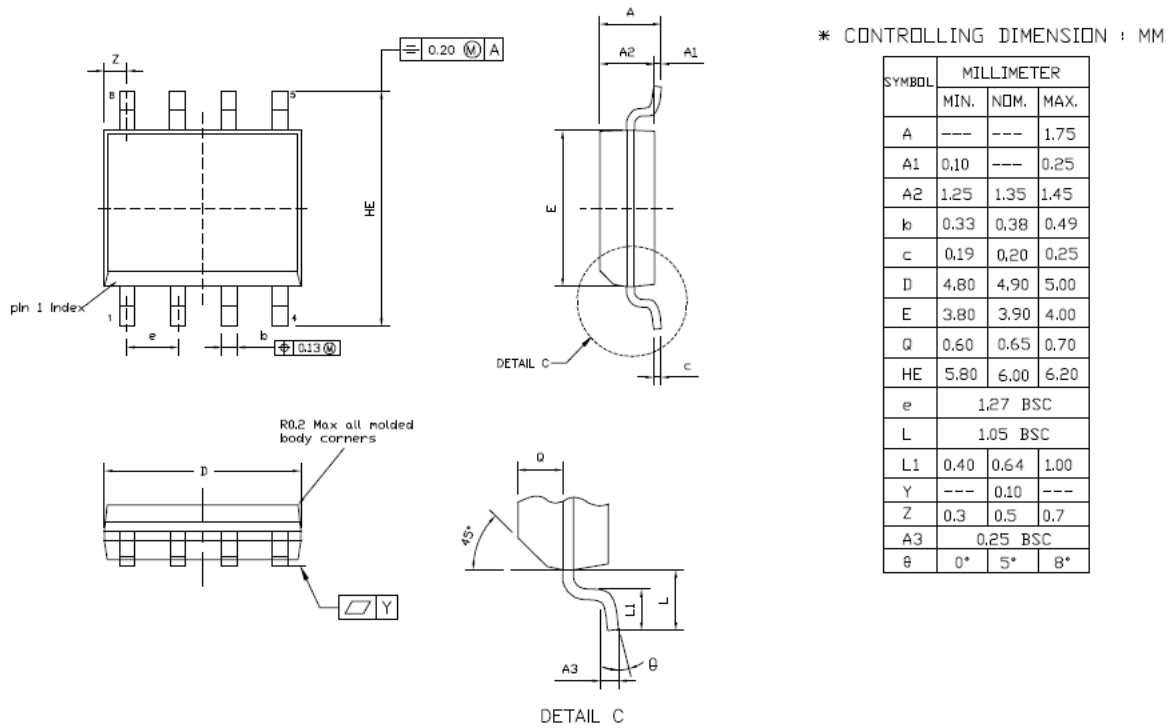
SOP8 Package Shape and Dimension in millimeters (inches)
